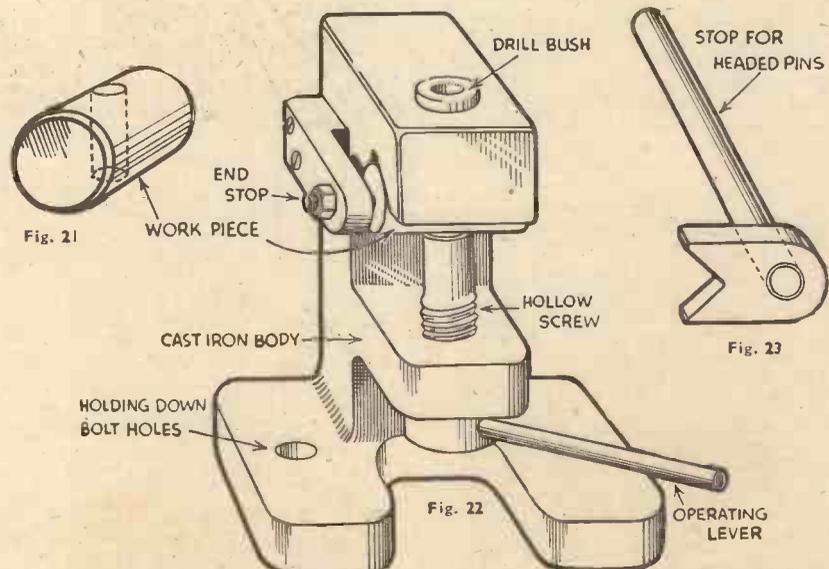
A jig may be utilised to deal with jobs similar to that shown. Fig. 22.—Details of the jig. Fig. 23.—An adjustable stop.
